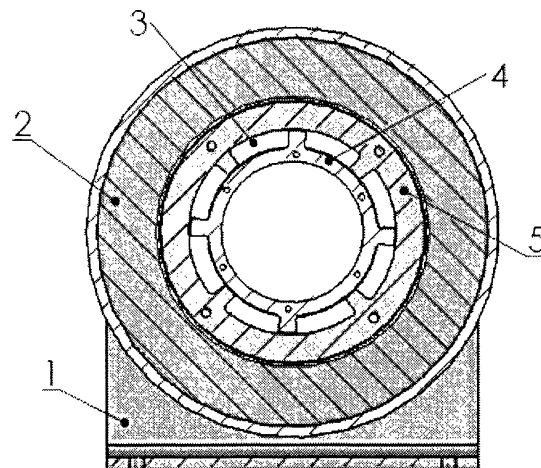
Cross section of ATVA design: 1. Frame support; 2. Magnetic circuit; 3. MR elastomer specimen; 4. Inner ring; 5. Outer ring
